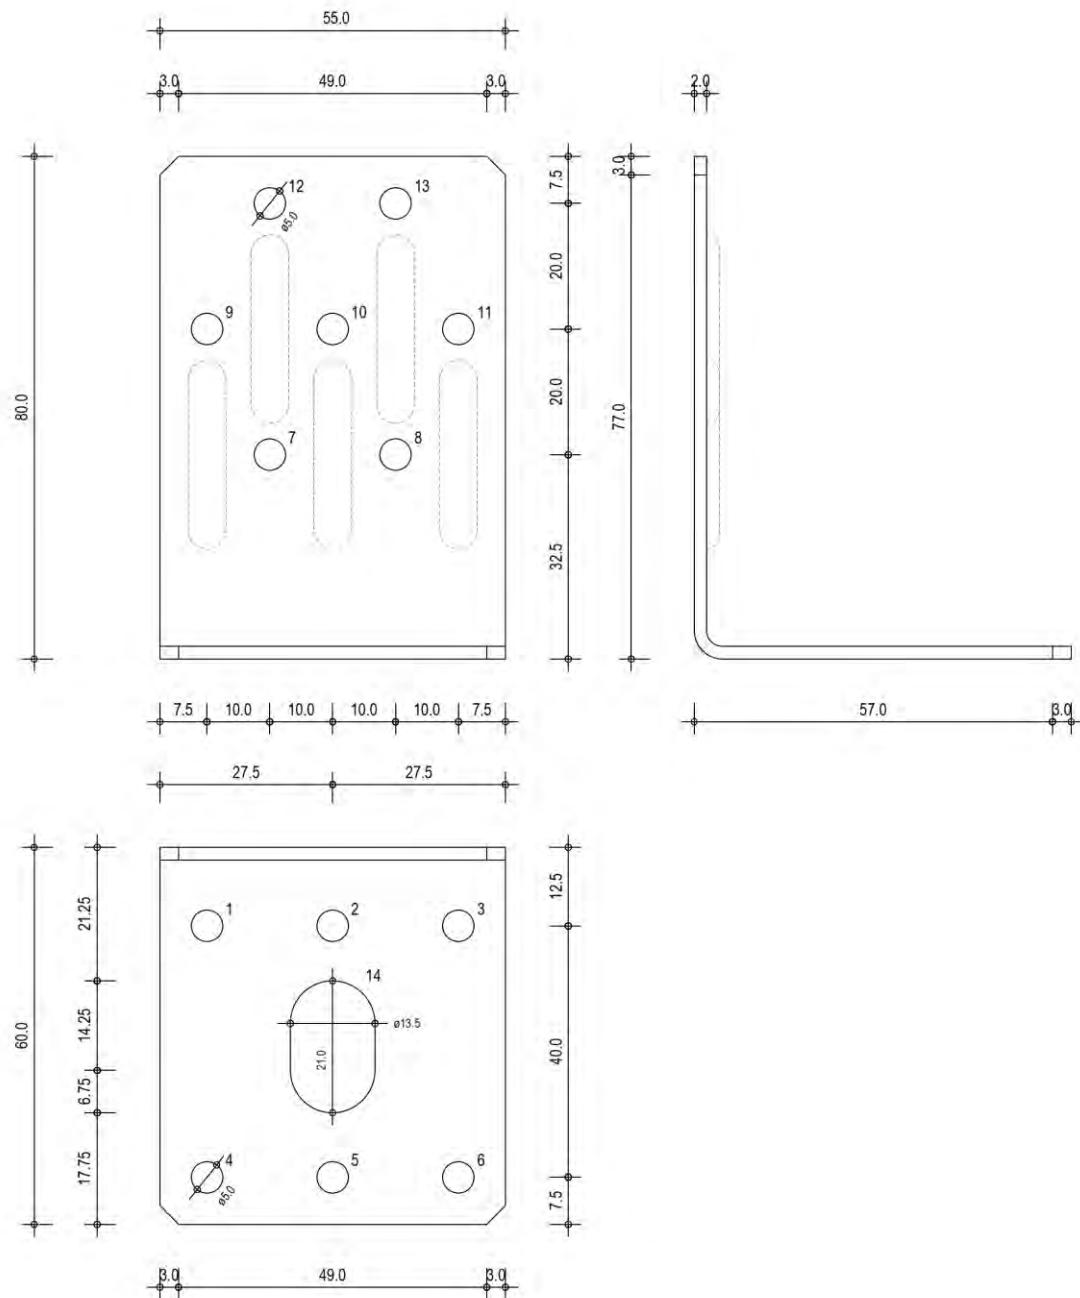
Dimensions of Angle Bracket 110829 and Washer 111314
